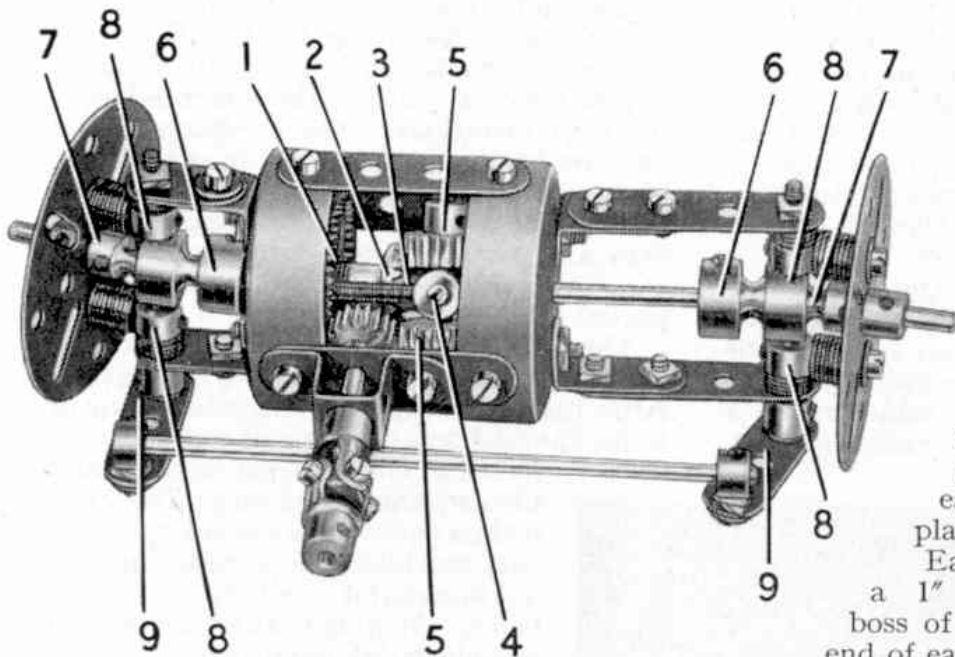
The front wheel drive mechanism that is described in detail on this page.
